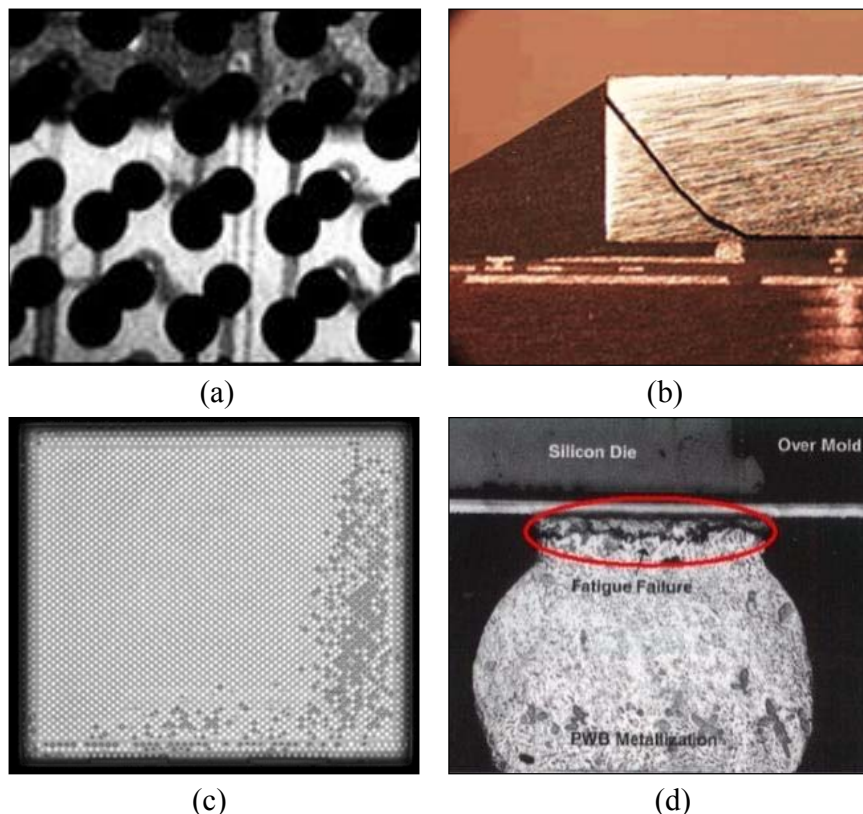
(a) Component misregistration, (b) die cracking, (c) underfill delamination, and (d) solder bump fatigue failure [1]
